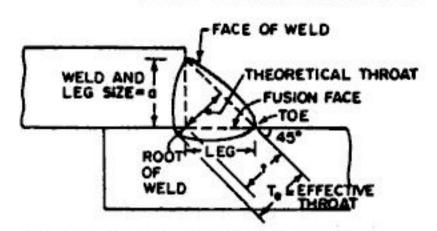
FILLET WELD TERMINOLOGY
